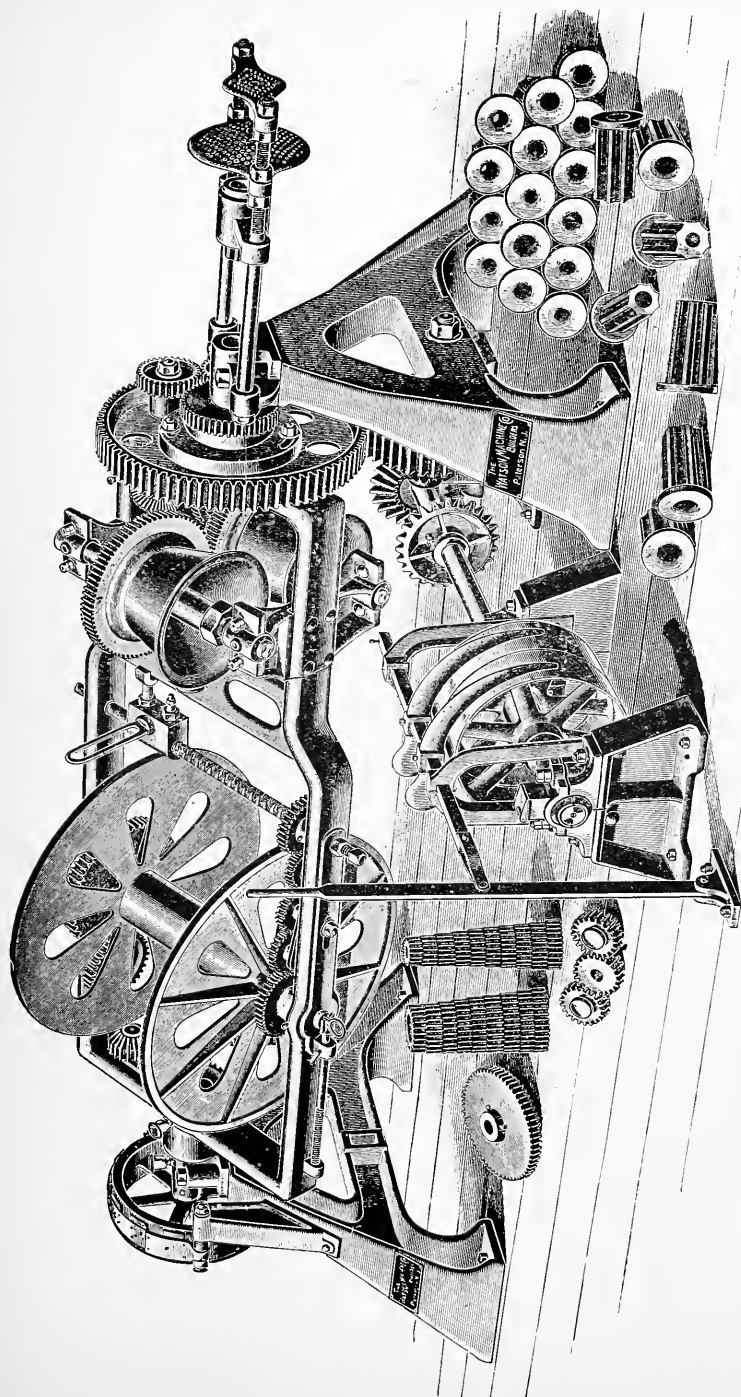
Horizontal strand forming machine to make strands from $\frac{3}{4}$ inch diameter to 2 inches diameter.
